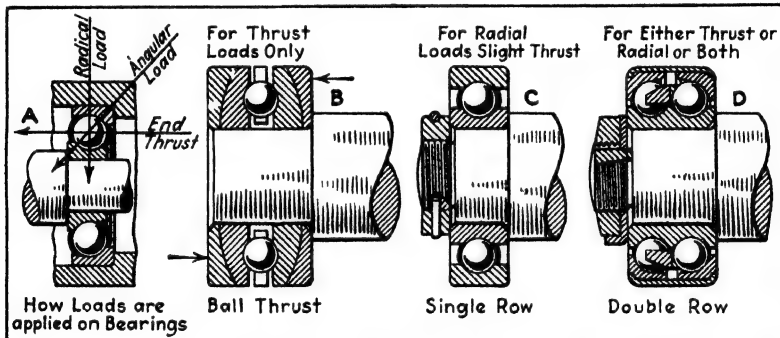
Types of Ball Bearings Used in Motor Construction.
